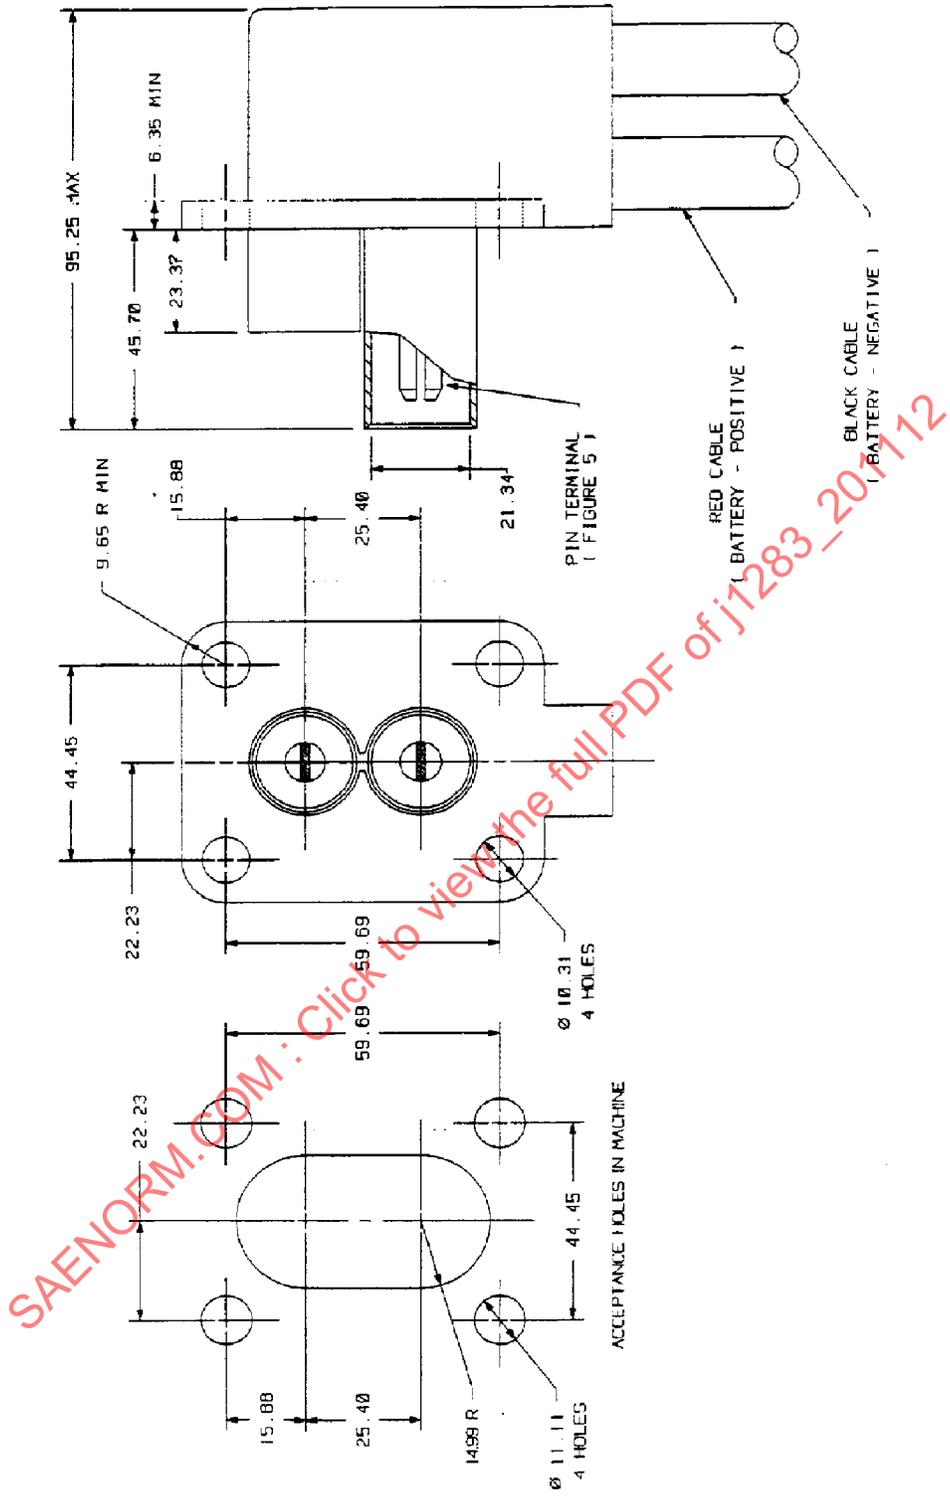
RECEPTACLE ASSEMBLY—90 DEGREES
